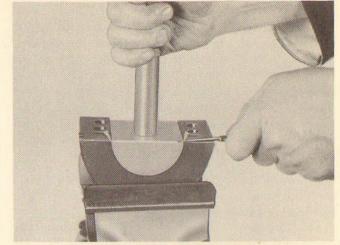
Installing Oil Seal in Rear Main Bearing Cap
